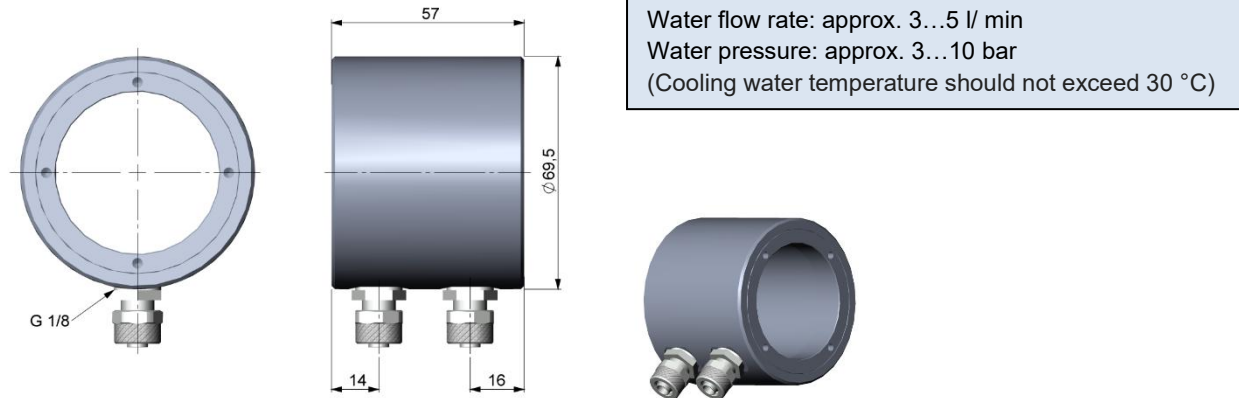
Water cooled housing [Order No.: ACCTLW], hose connection: 6x8 mm, thread (fitting): G 1/8 inch
